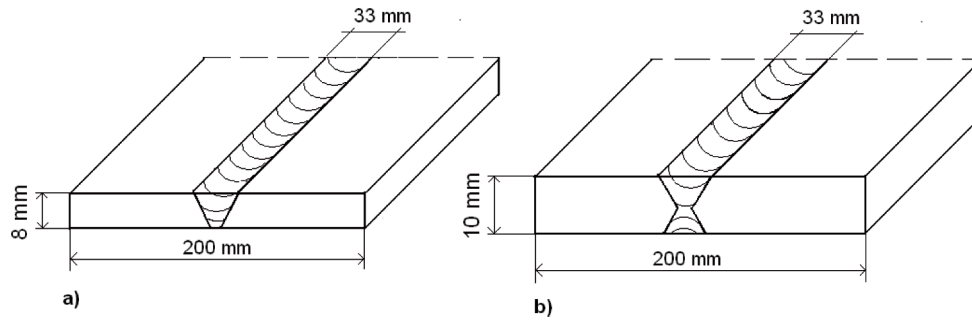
Sketch of FSW test joints; a) single-side welded joints; b) double-side welded joints
